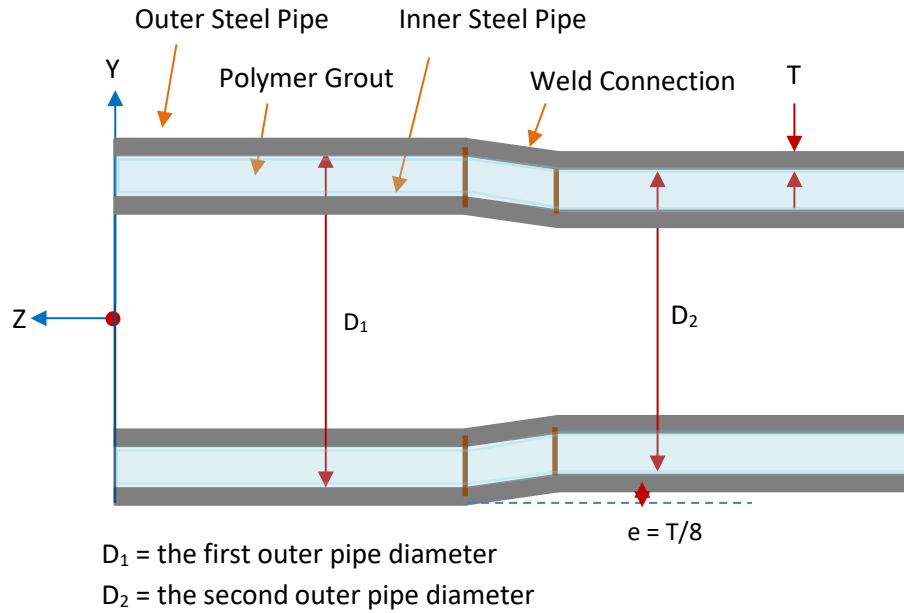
Tubular weld misalignment with weld offset
